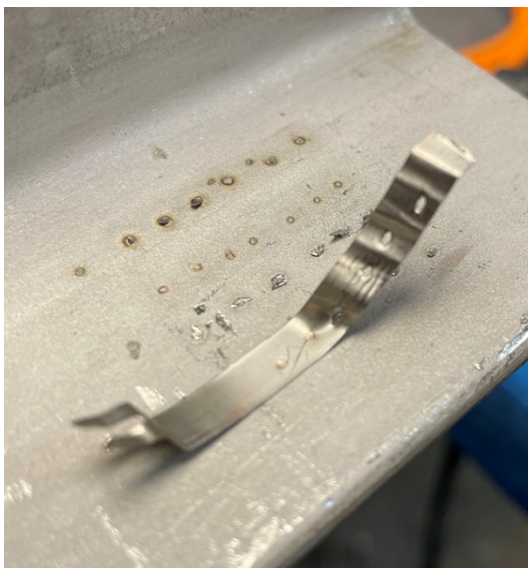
A demonstration of a good weld where holes have ripped in the test strip.
